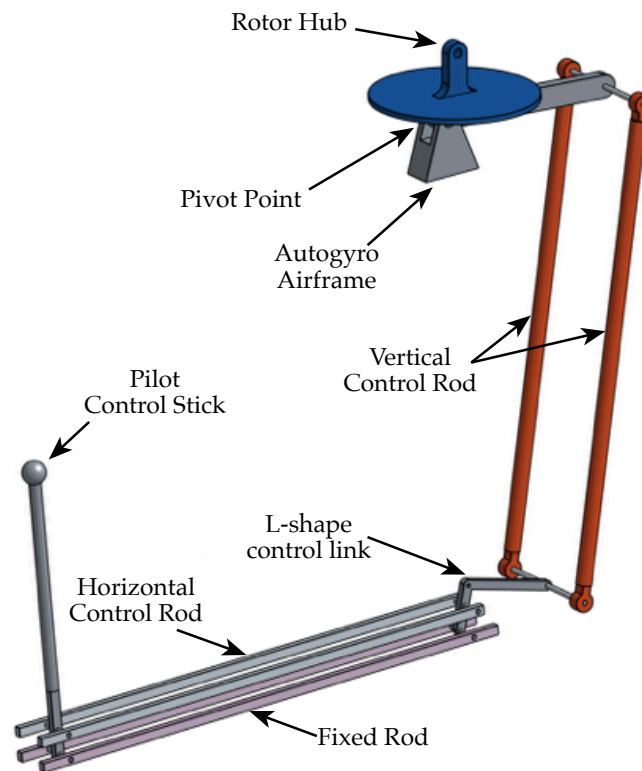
Assembly drawing of G-UNIV BASIC control linkages
